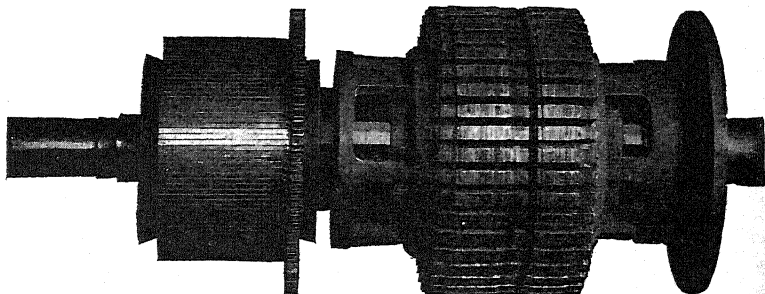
,049.—Westinghouse armature core and commutator assembled on sleeve in large machines.
